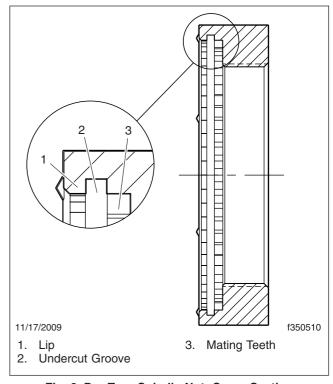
, Pro-Torq Spindle Nut, Cross Section
